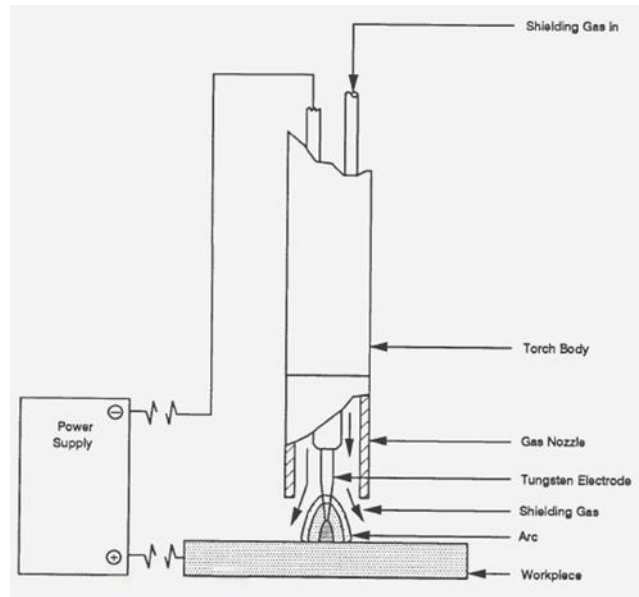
Schematic of gas tungsten arc welding process [4]
